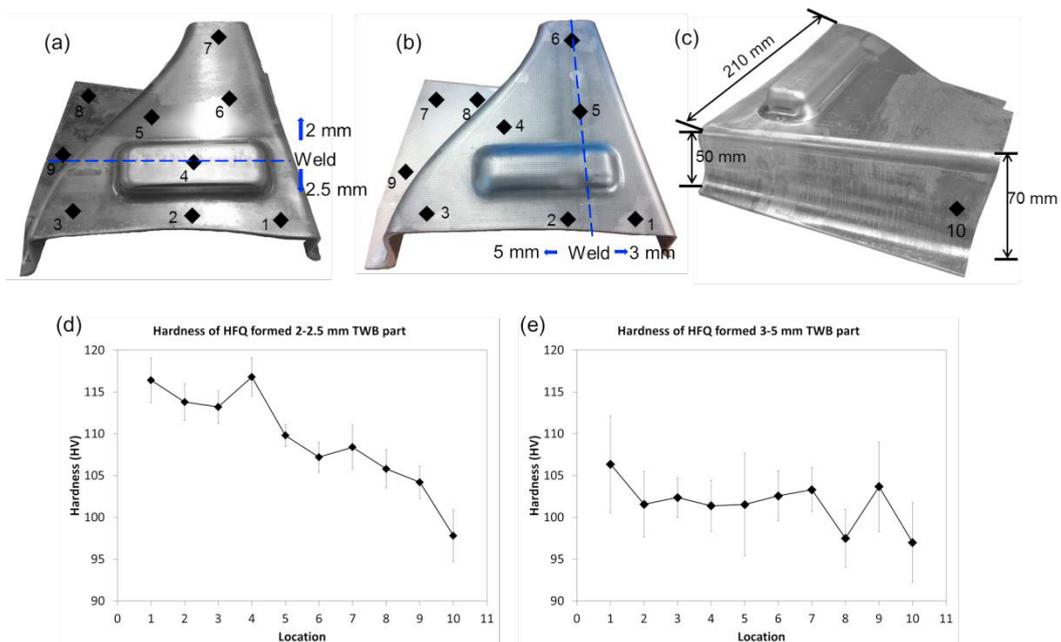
HFQ® formed parts of (a) 2.0-2.5 mm TWB, (b) 3.0-5.0 mm TWB and (c) dimensions of the part, and hardness profiles for the (d) 2.0-2.5 mm and (e) 3.0-5.0 mm TWB parts.
